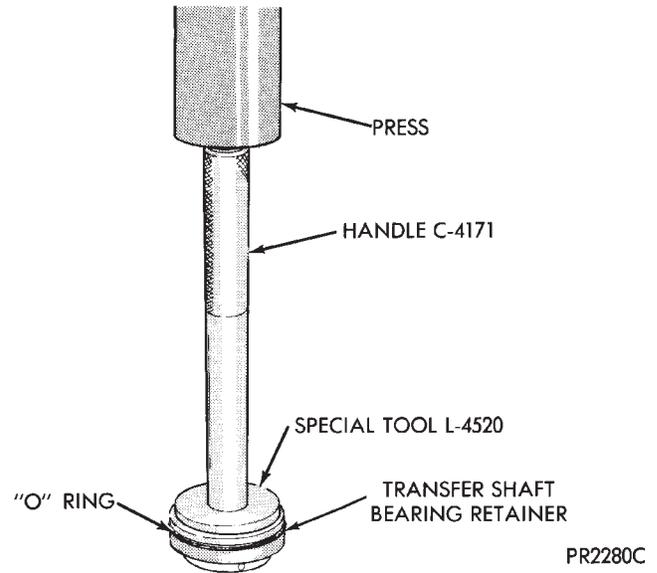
Remove Transfer Shaft Bearing Cup
